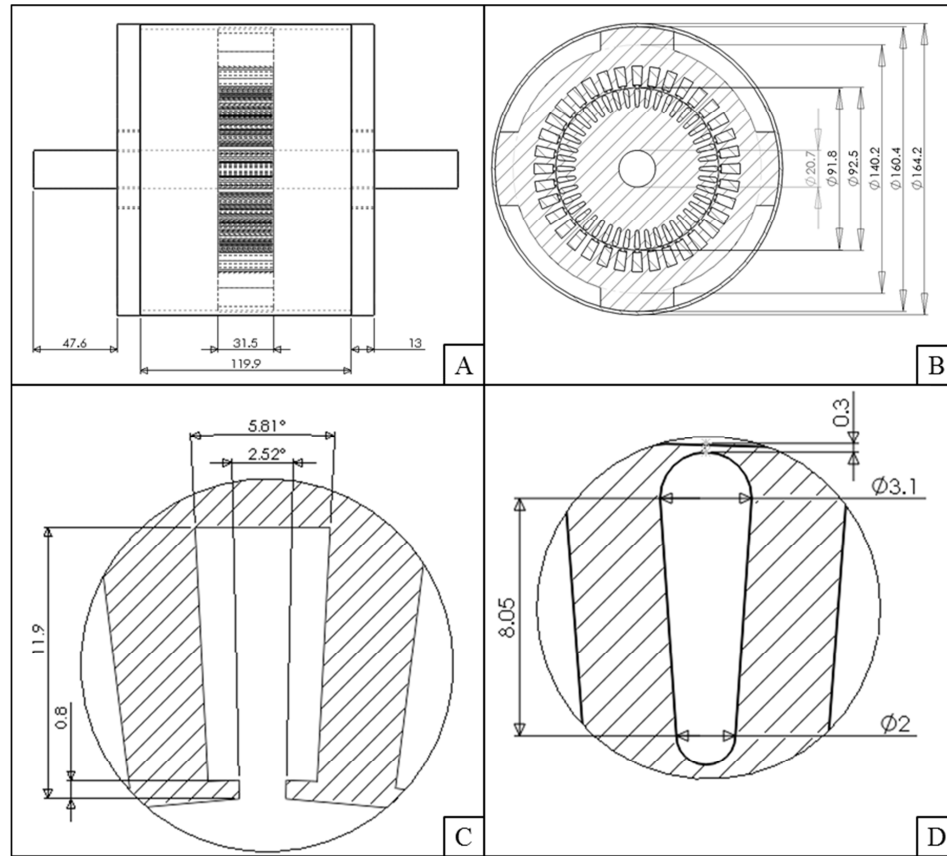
Induction machine axial dimensions (A), radial dimension (B), stator slot dimensions (C) and rotor bar dimensions (D)
